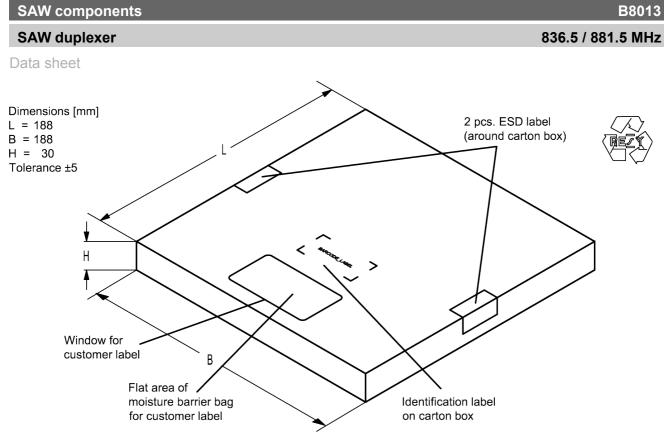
Drawing of folding box for reel with diameter of 180 mm.
